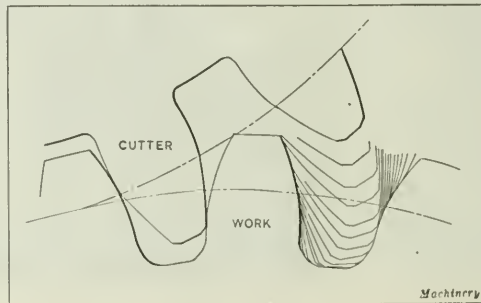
Diagram illustrating Action of Gear Shaper shown in Fig. 2
